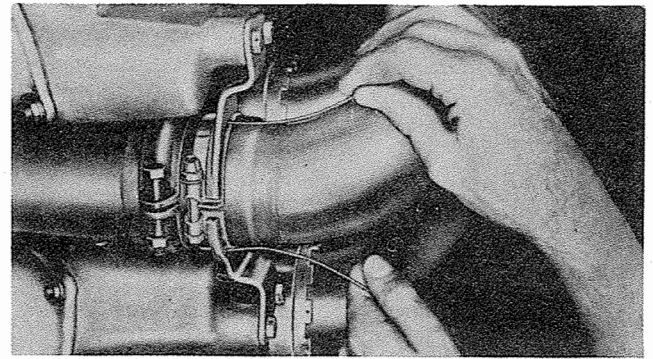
Removing Wire Stock from Exhaust Pipe Brackets
